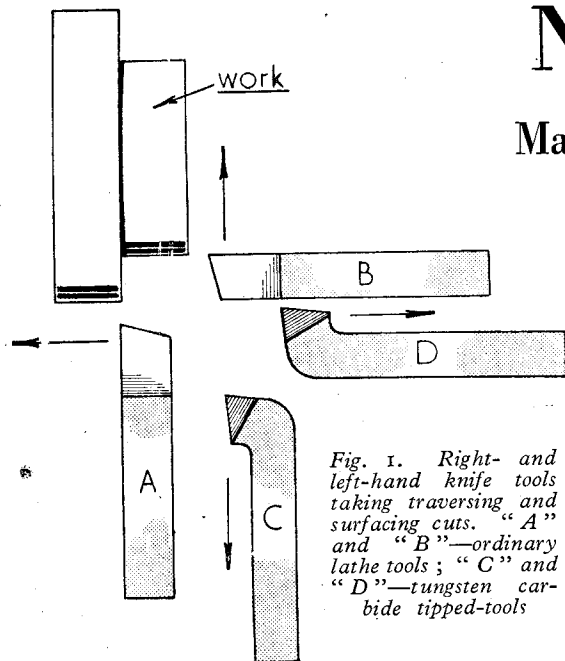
Right- and left-hand knife tools taking traversing and surfacing cuts. "A" and "B"—ordinary lathe tools; "C" and "D"—tungsten carbide tipped-tools
